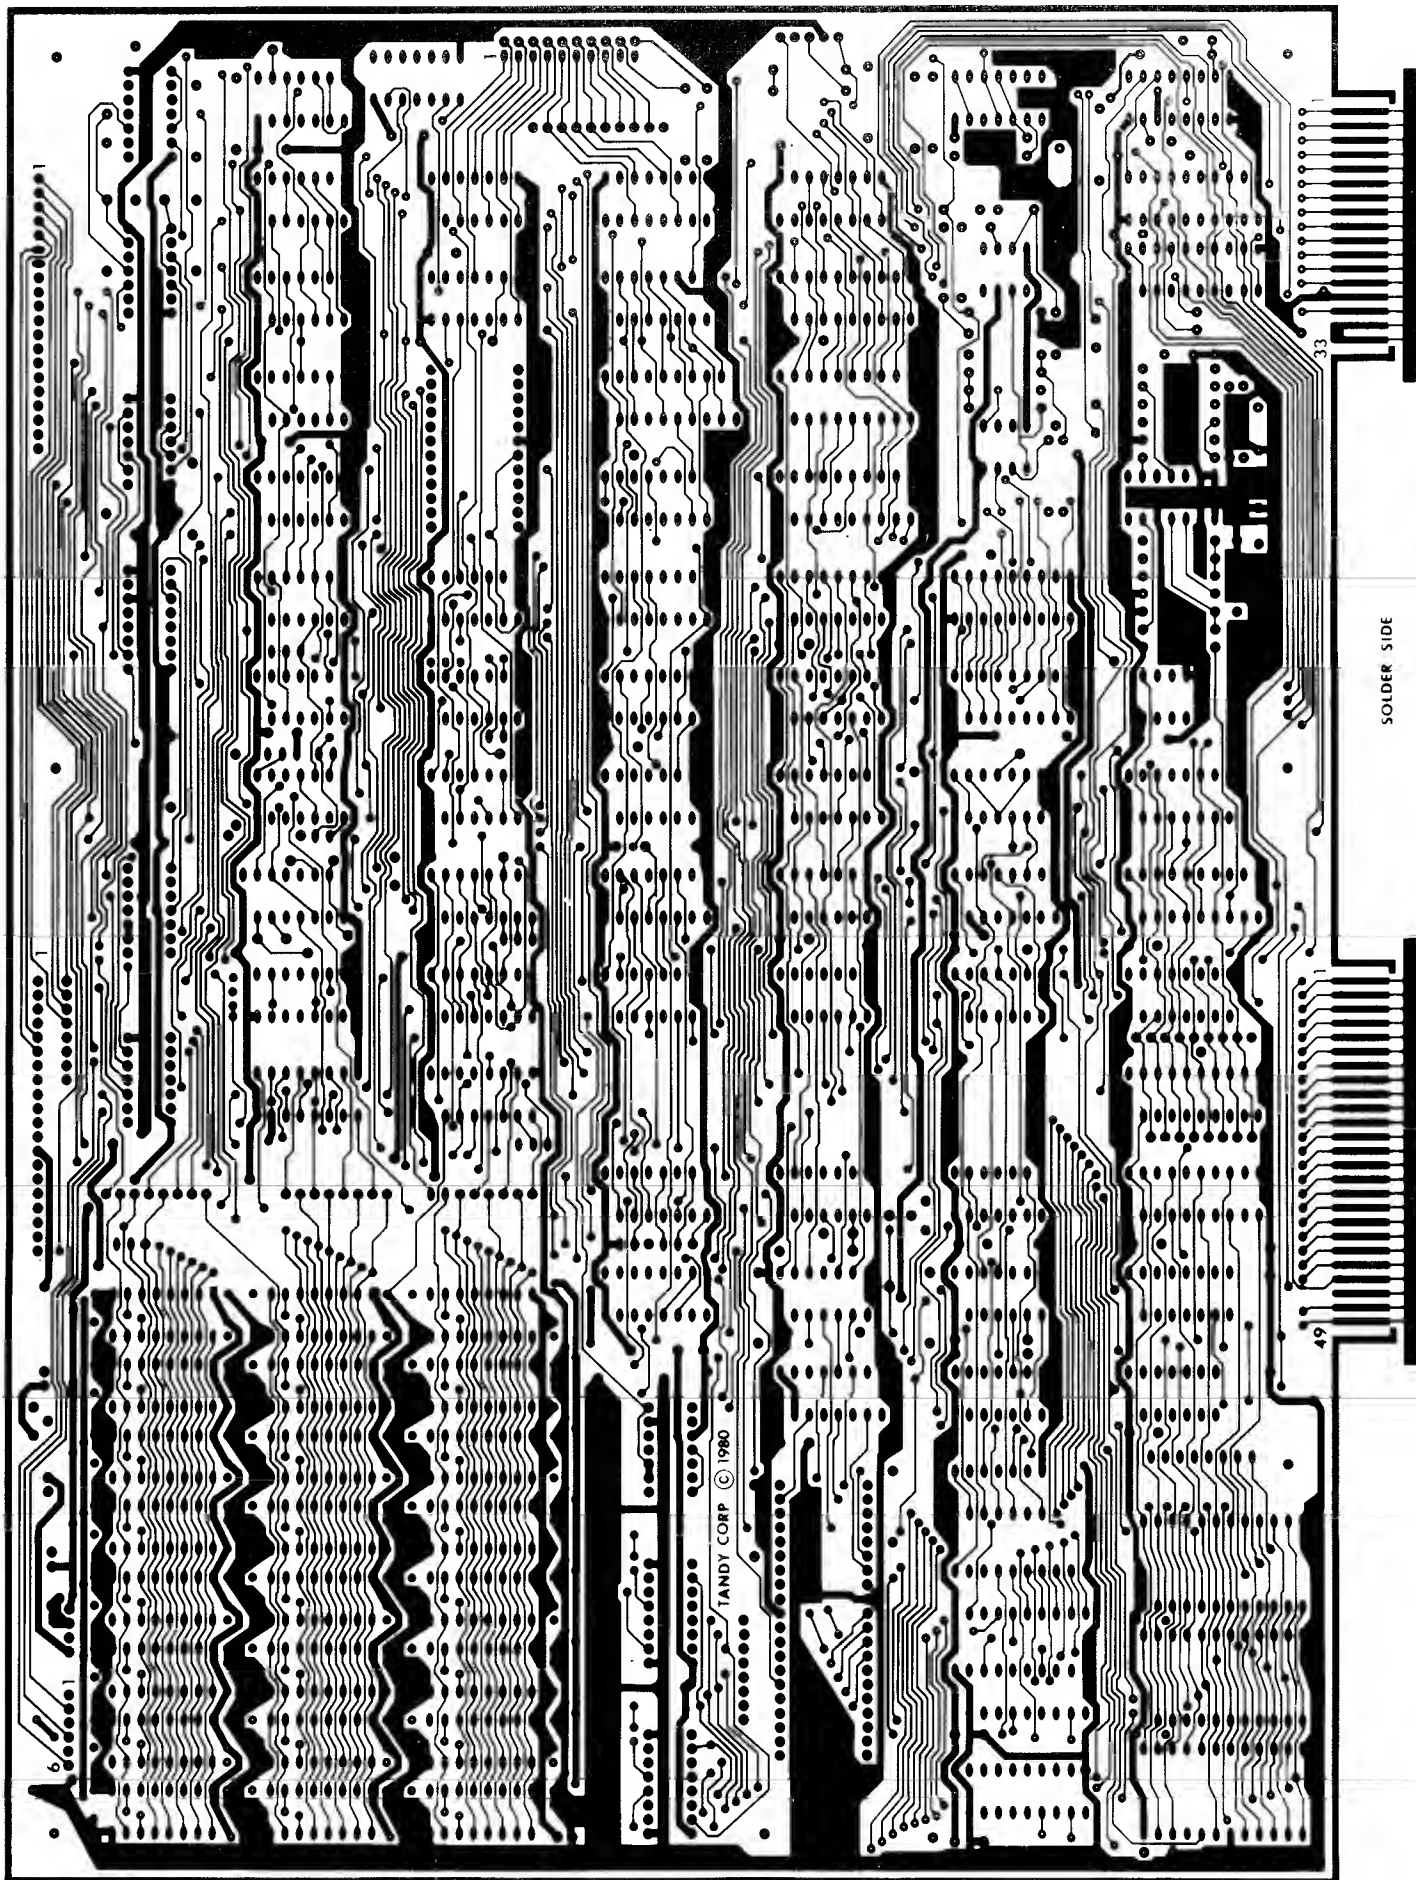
CPU PRINTED CIRCUIT BOARD — CIRCUIT SIDE
